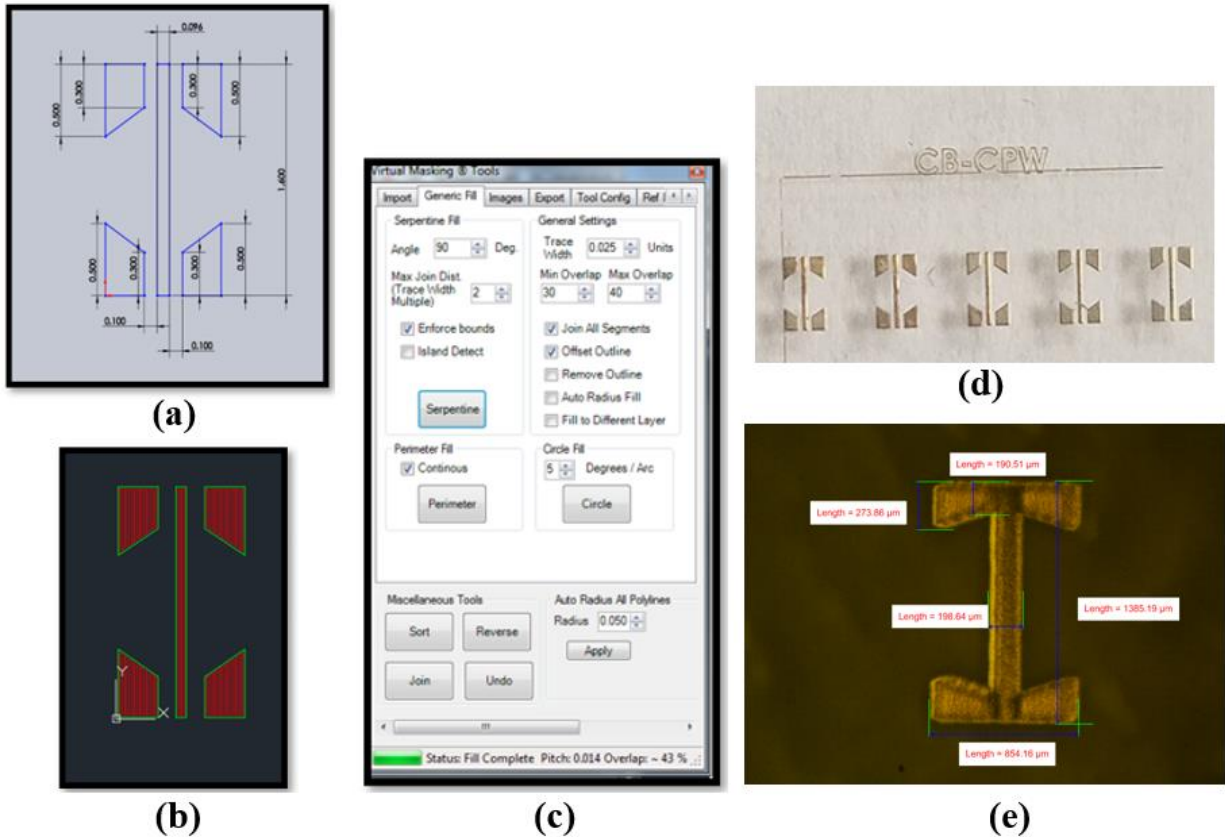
(a) CB-CPW sketch (b) CB-CPW serpentine fill (c) VMTTools™ properties (d) 3D printed model (e) Feature size measurement
